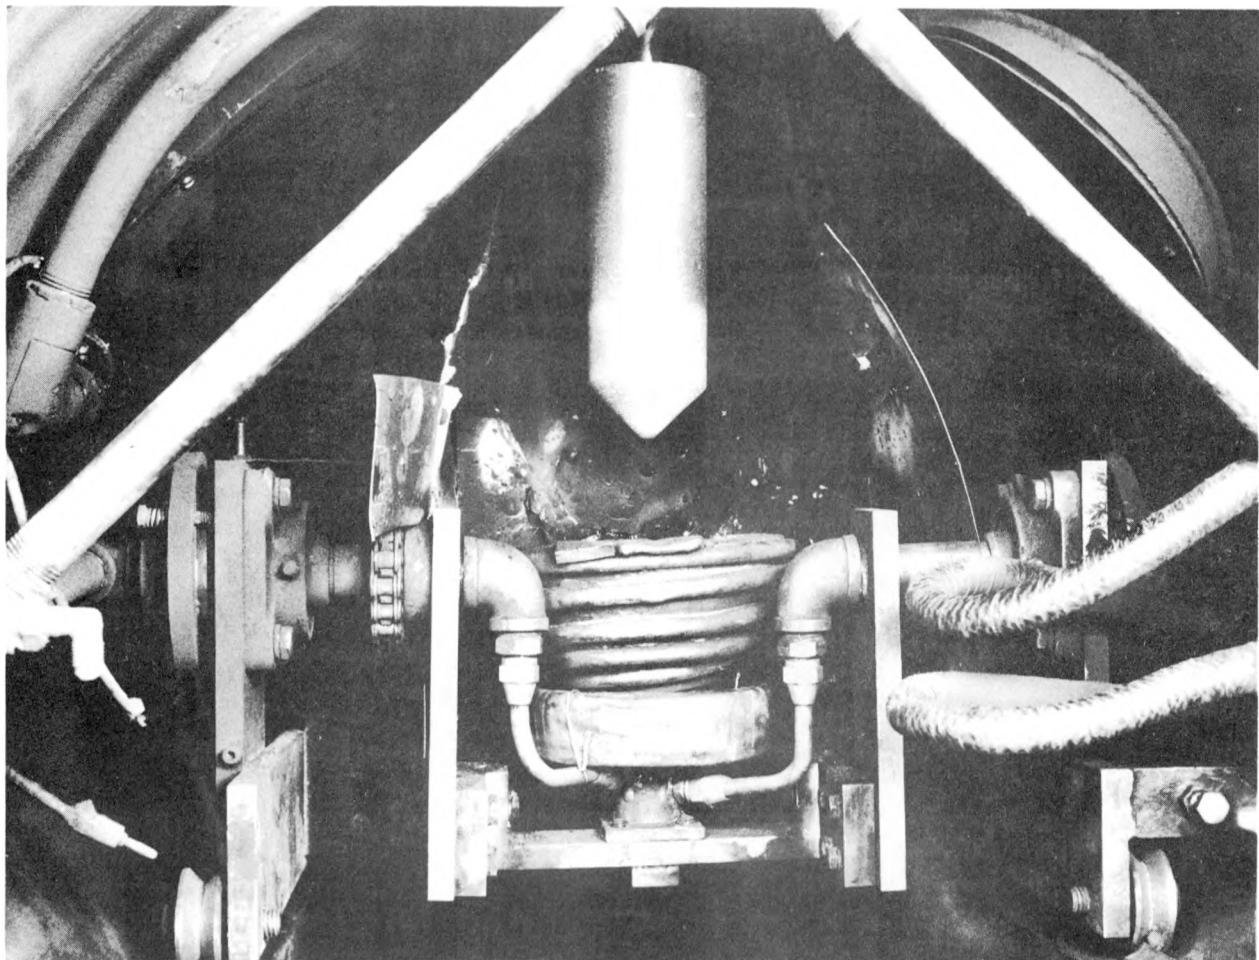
View of Ladle Assembly Showing Coil Positioned at Base of Ladle. Flexible Leads in Lower Right Foreground Carry Power and Water To and From the Coil.
